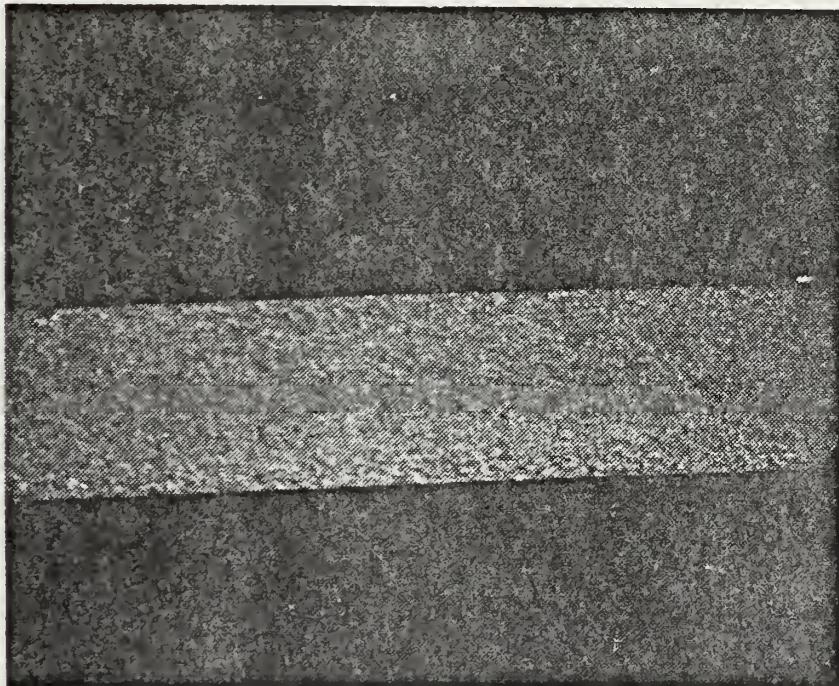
Macro-fractograph of specimen QT-0-5, which was fractured after 46,100 cycles at 48 ksi. Even though tested at a low stress, there is no fatigue zone. X10.
